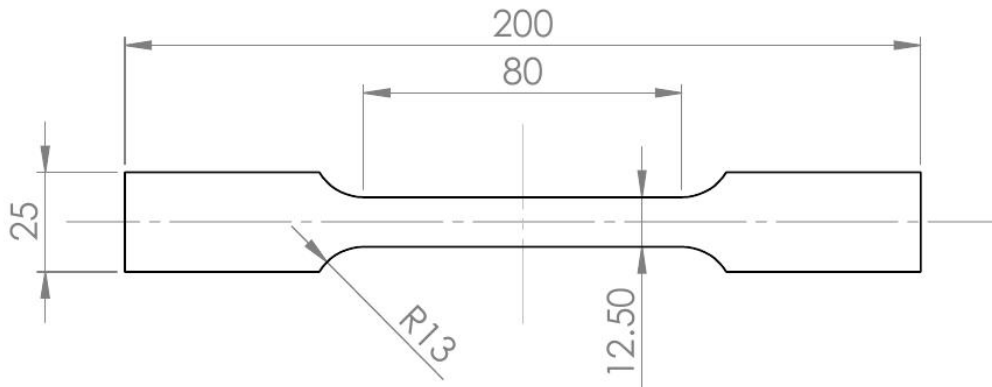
Drawing of the tensile specimens which were cut from the material sheet as indicated in Figure 5.1.
